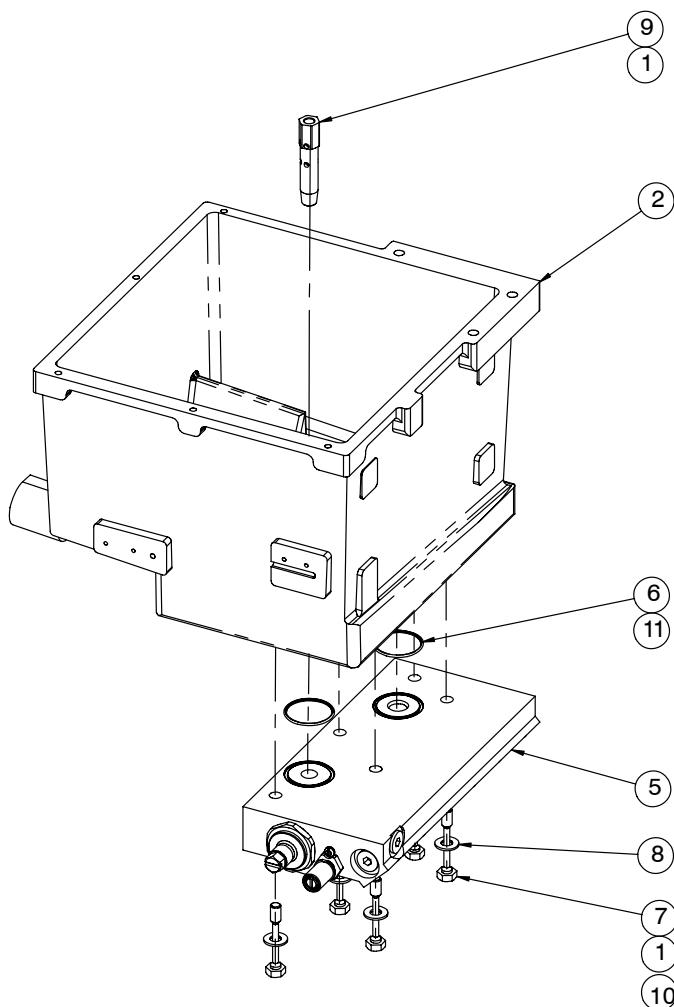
Tank/manifold parts, 200–240V or 400/230 Y
